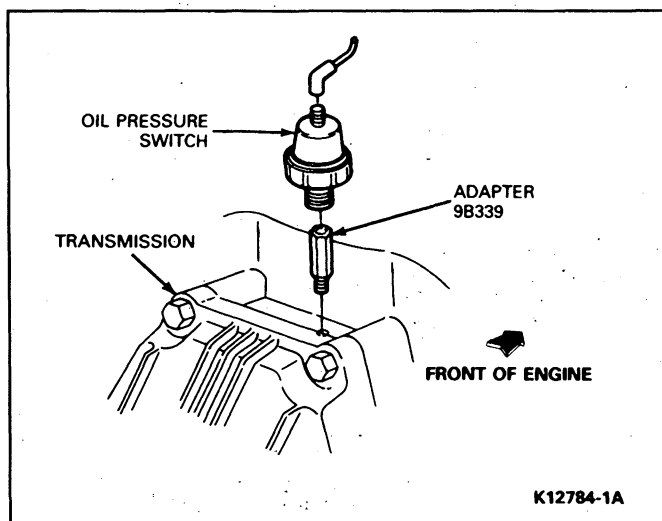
Oil Pressure Sender Unit—7.3L Diesel Engine
